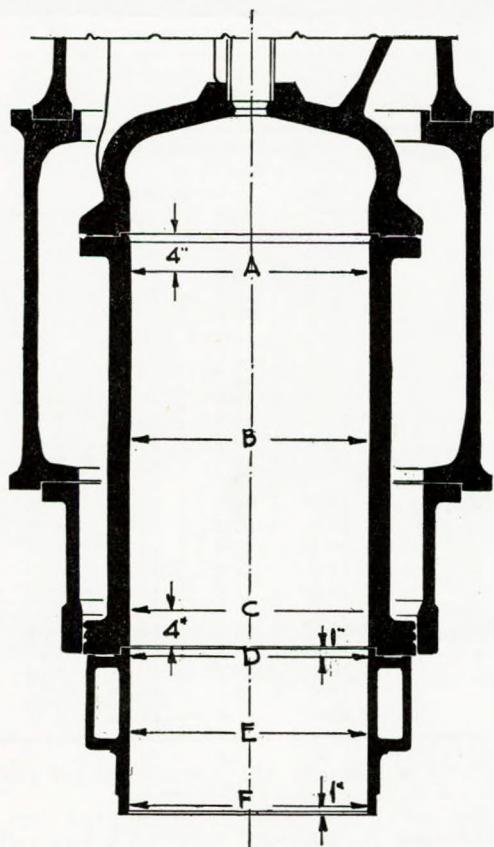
Points at which liners of "Auricula" were gauged for wear.
